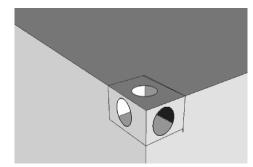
STANDARDISED COLD CONTAINER (FOUR CORNERS OF THE DEVICE)
